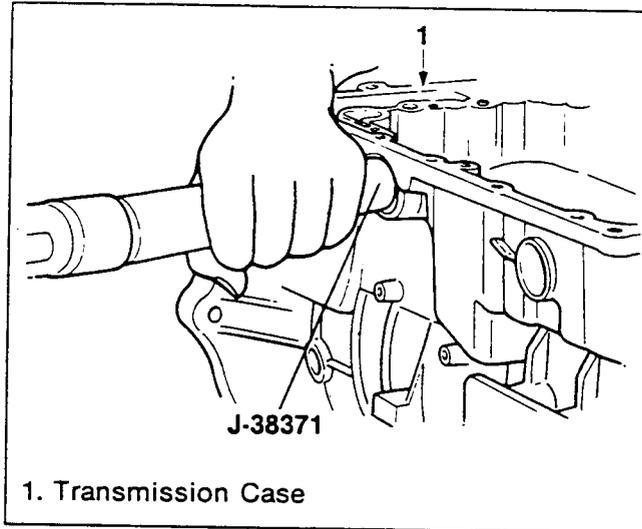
Low One-way Clutch Inner Race Bolt Installation
